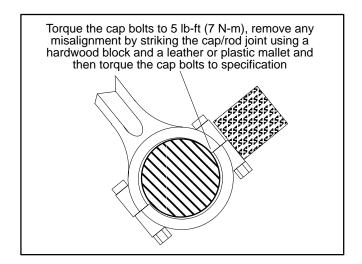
ALIGNING CONNECTING ROD CAP
